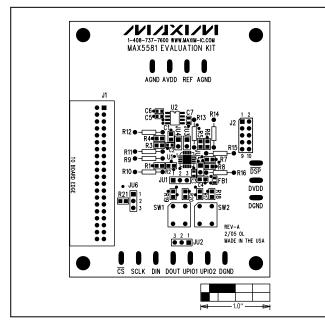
MAX5581 EV Kit Component Placement Guide— Component Side
